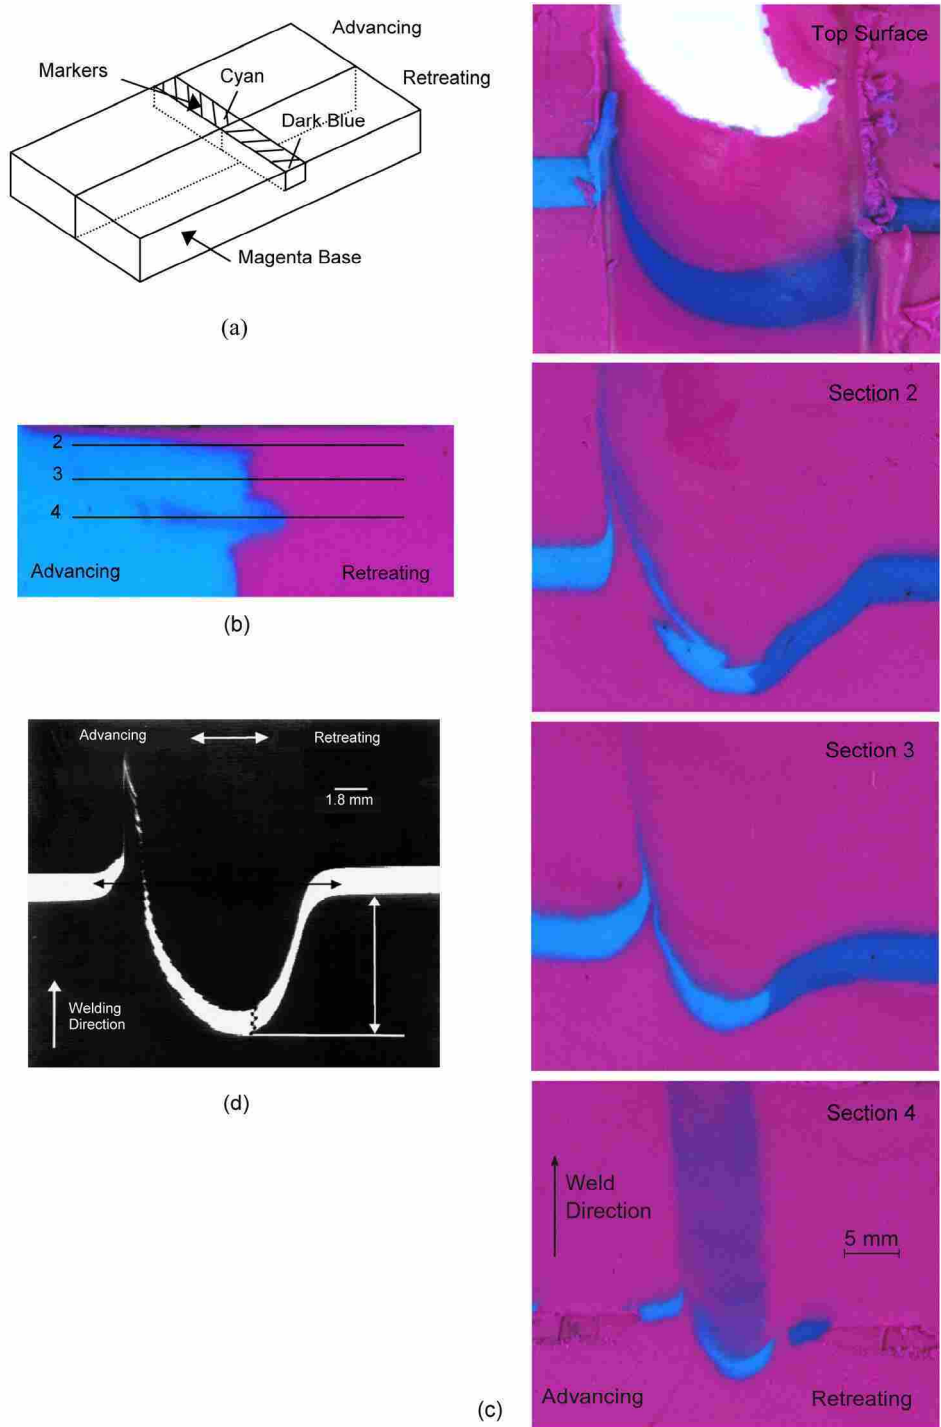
Weld performed in workpiece with contrasting marker inserts: (a) contrasting marker insert setup sketch; (b) cyan/magenta butt weld cross-section from weld (250 rpm and 1.1 mm/s traverse speed) showing corresponding horizontal section cut locations for marker insert study; (c) marker insert weld horizontal sections at several vertical depths (250 rpm, 1mm/s traverse speed); (d) weld horizontal section (slightly below weld mid-plane) of aluminum weld using similar marker insert technique from Reynolds [6].
